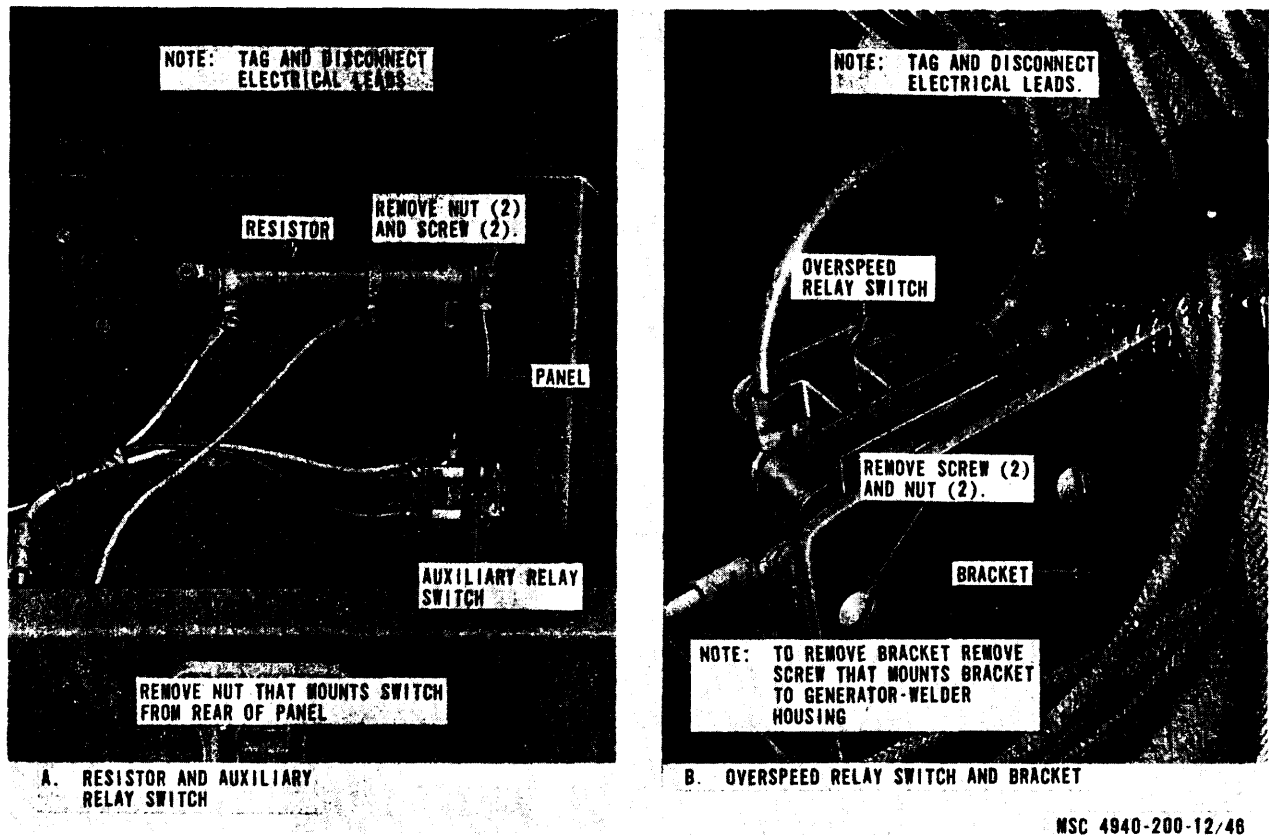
Resistor, auxiliary relay switch, overspeed relay switch and bracket, Model CMU-5, removal and installation.
